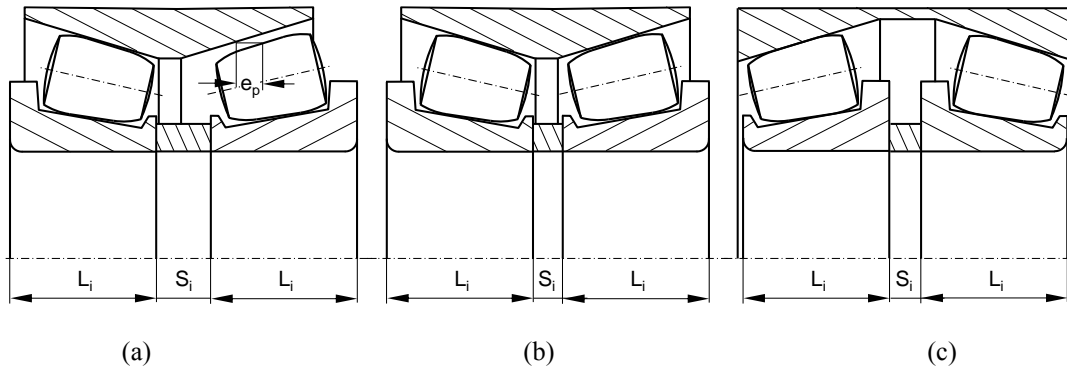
Tapered roller bearing with two rows: (a) Back to back (double cup assembly) mounting with play; (b) Back to back (double cup assembly) mounting with preloading; (c) Front to front (double cone assembly) mounting.
